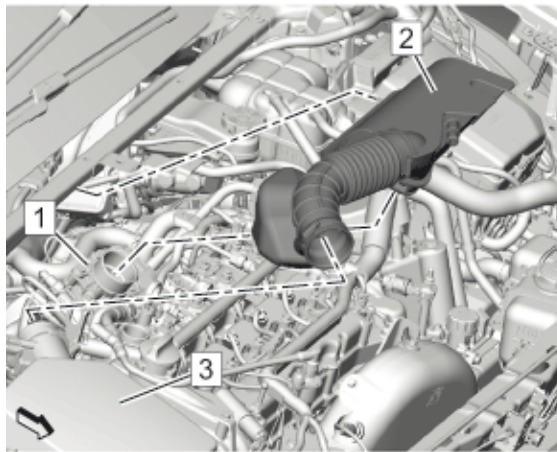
Air Cleaner Outlet Duct, Air Cleaner Assembly And Throttle Body
